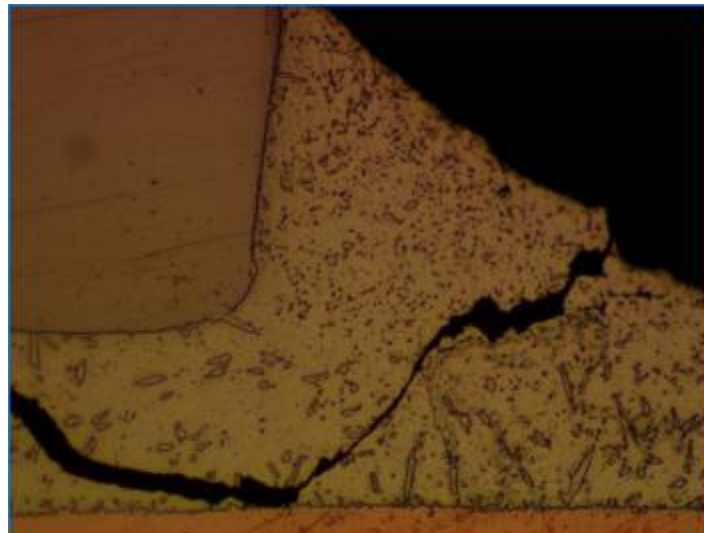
cross section, SN66, U61, right lead solder crack, 400xb
